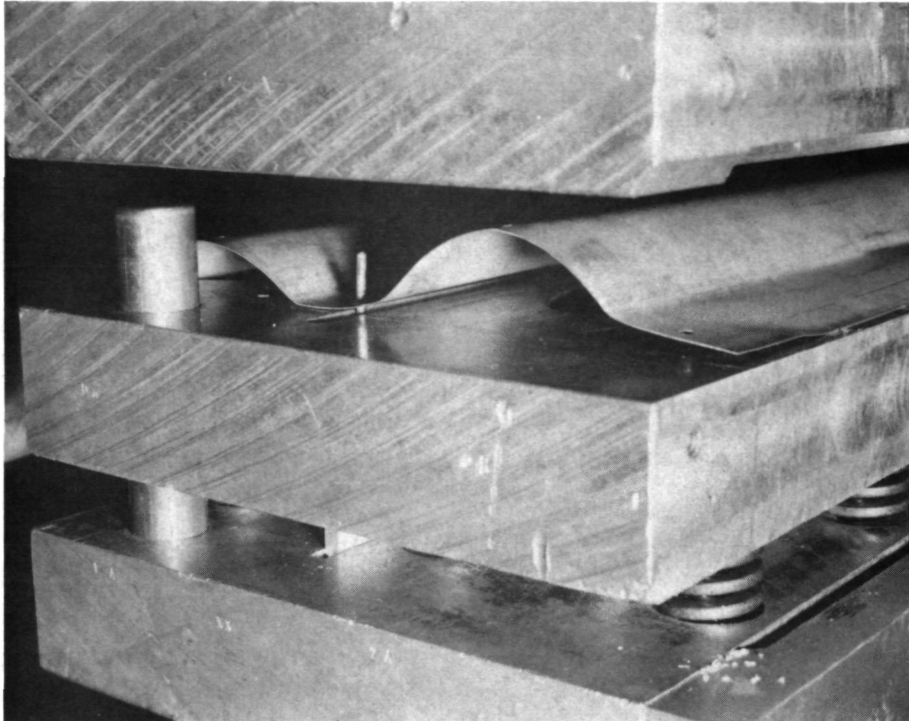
PANEL UNIFORM SECTION POSITIONED FOR FIRST STAGE END CLOSURE FORMING
